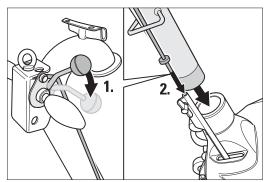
When inserting the guide tube, make sure that the rod linkage of the lowering mechanism feeds in correctly!
